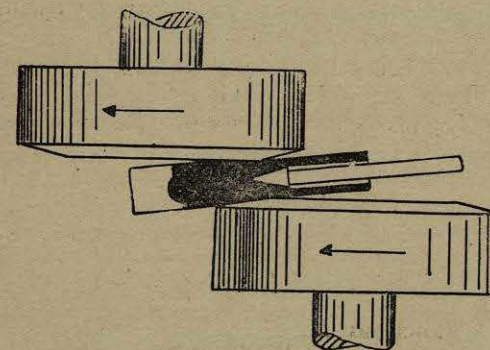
The Stiefel Process for rolling Weldless Steel Tubes.
